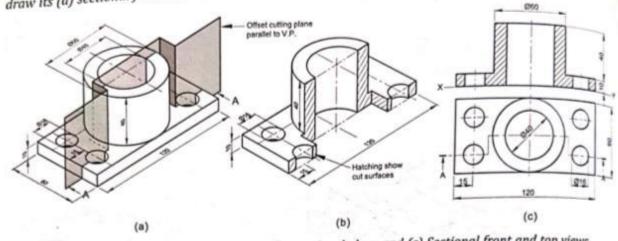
Object (a) Pictorial view; (b) Cut by offset sectional plane and (c) Sectional front and top views
